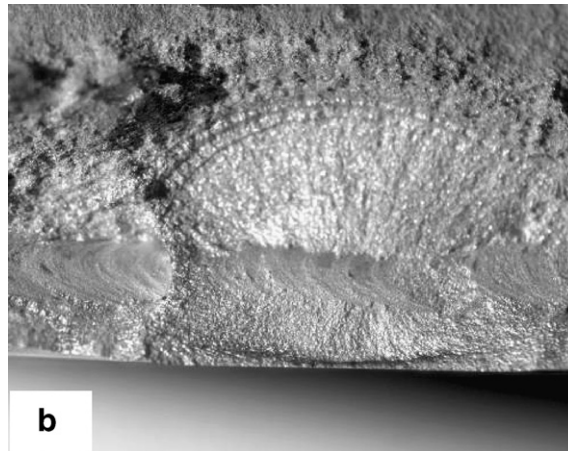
Typical fatigue crack initiation site in weld 7: tensile strength = 294 MPa, tool feed rate = 185 mm/min, tool speed = 348 rpm and tool pitch = 0.53 mm/rev and average fatigue life = 45021 cycles.
